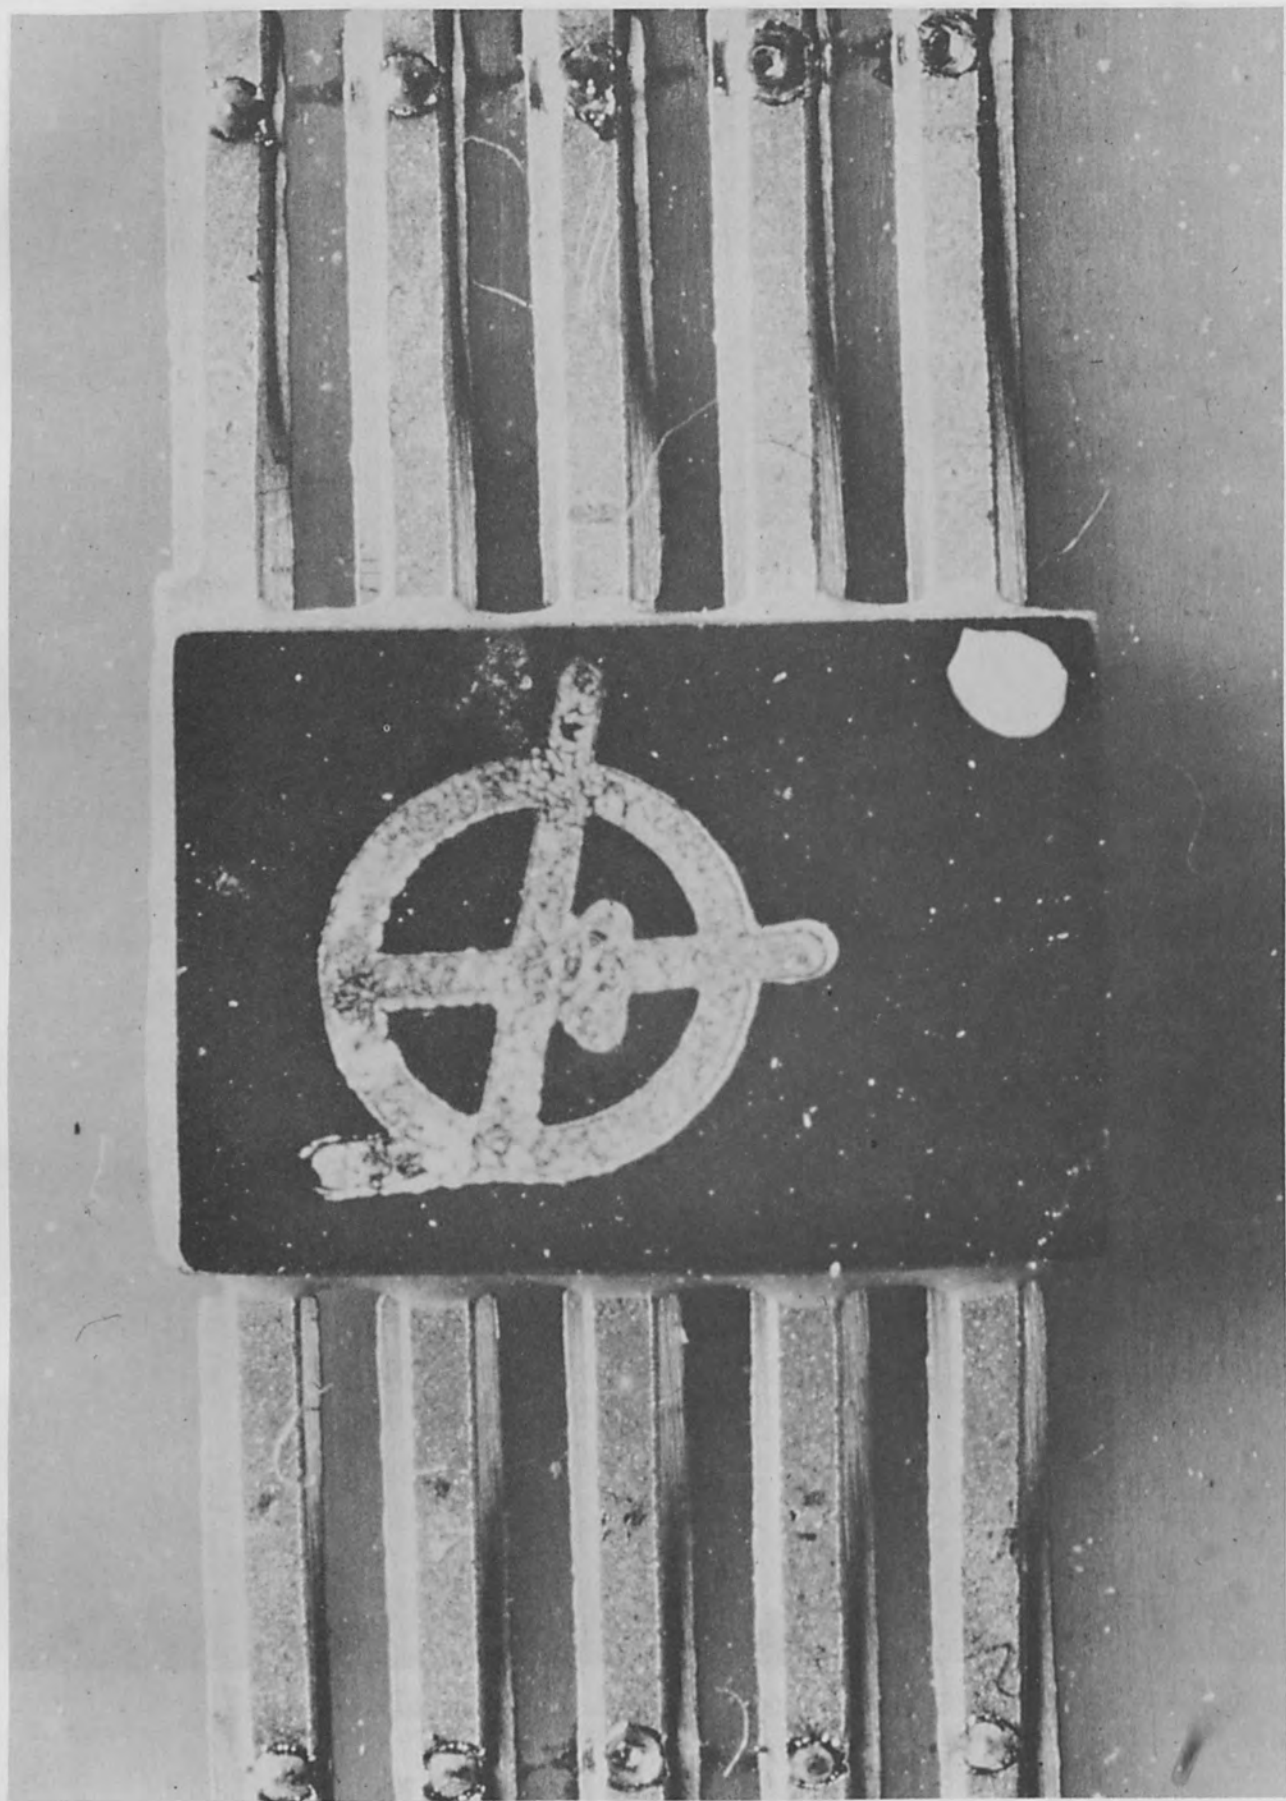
Spot welds of leads from a flat pack to a circuit board.
